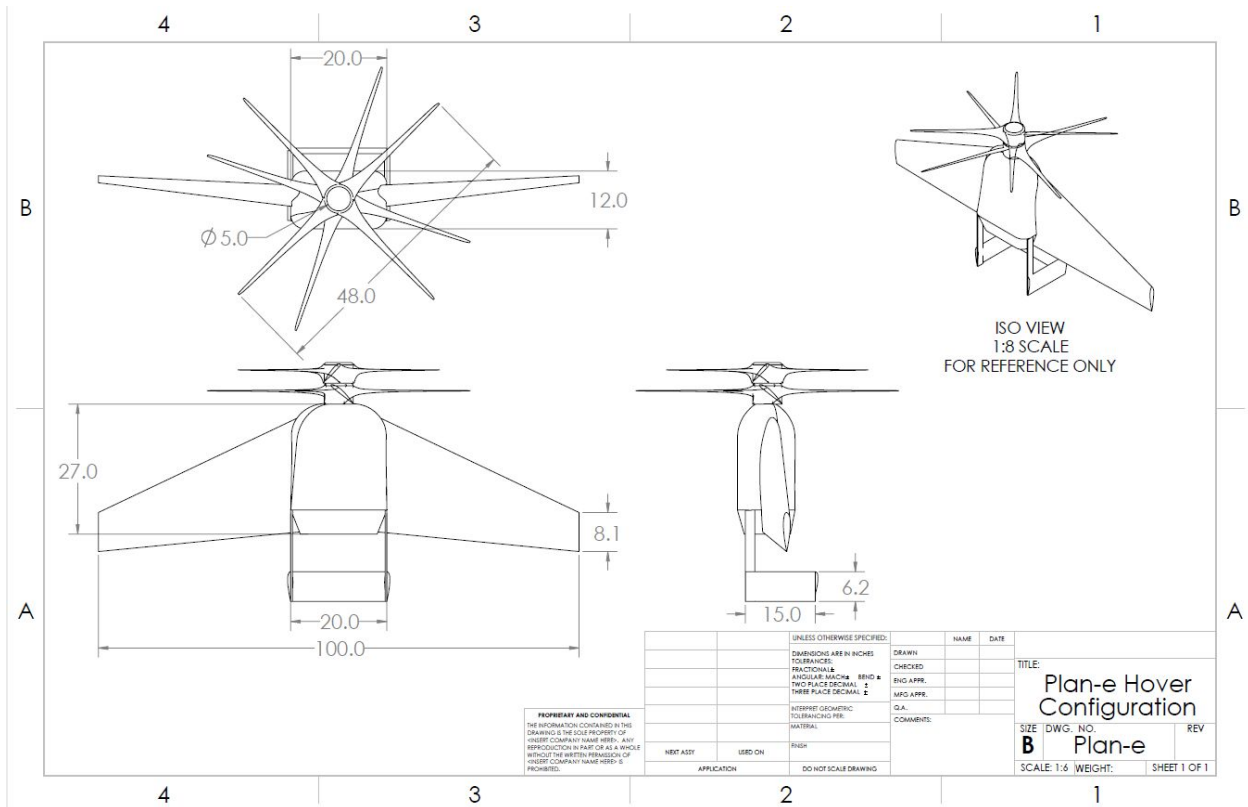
PLAN-E Engineering Drawing with Relevant Dimensions
